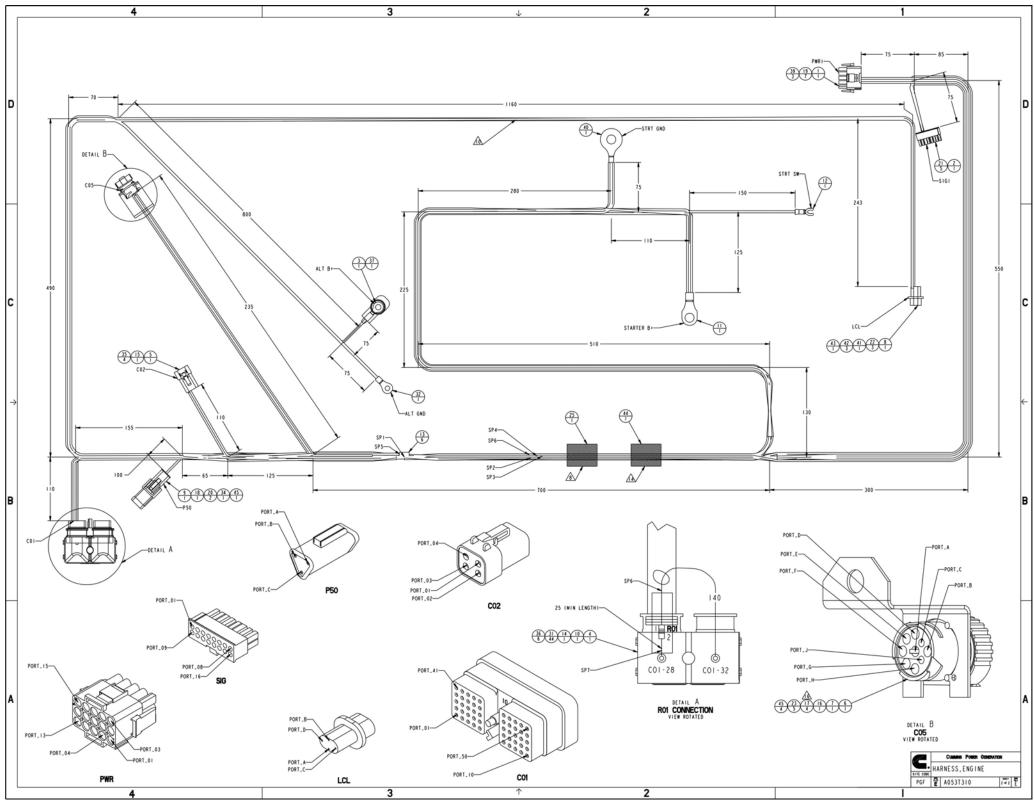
HARNESS, ENGINE (SHEET 2 OF 2)
